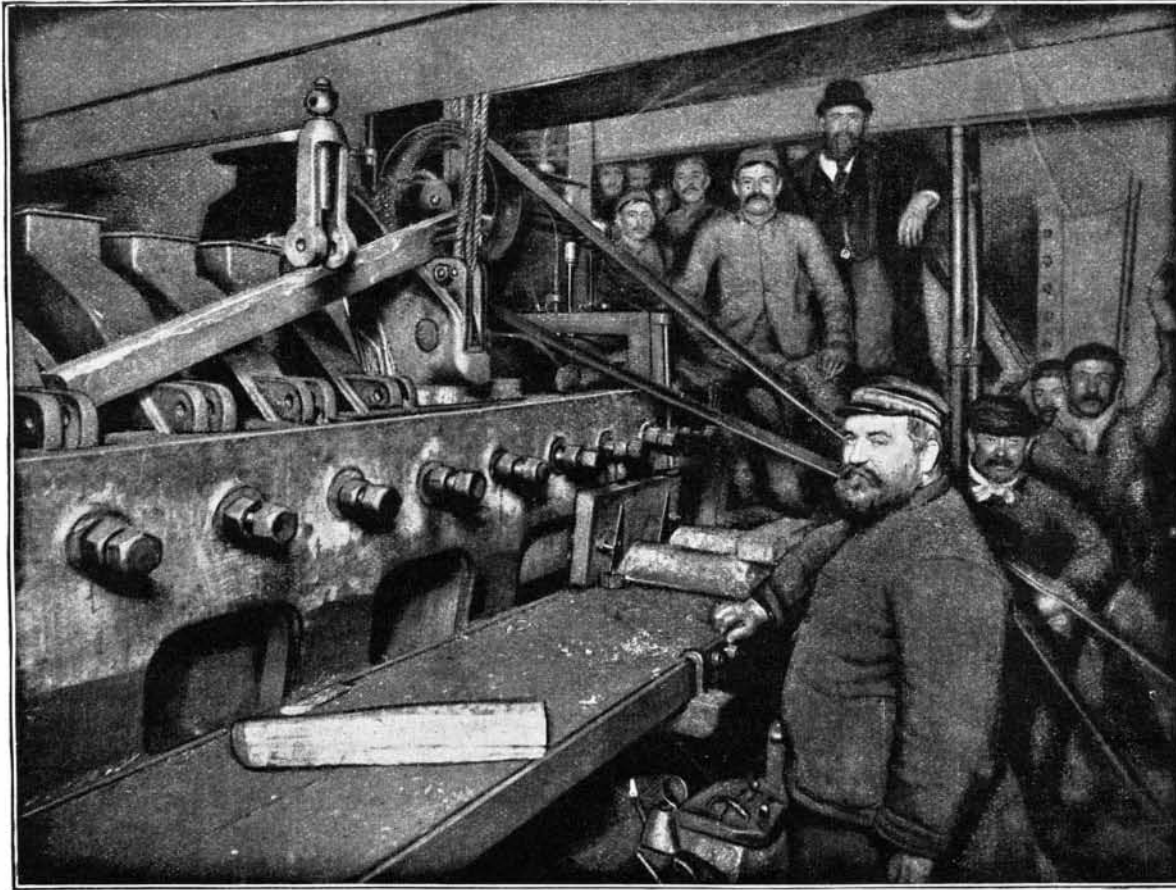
STEAMER UMBRIA—THE DUPLEX DRILLING MACHINE AT WORK.
